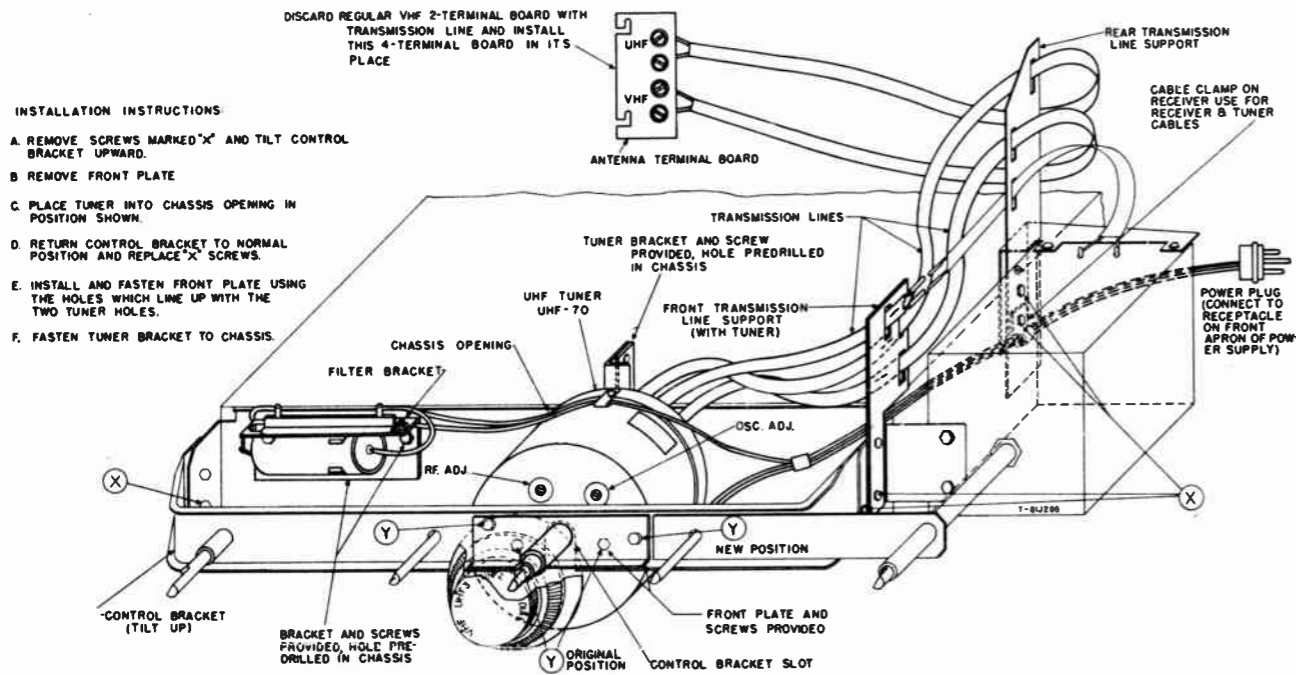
UHF-70 Tuner Assembly & Wiring Diagram
